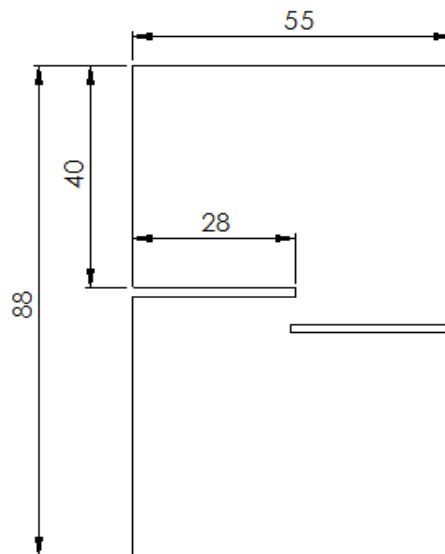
Ceramic bulk testing specimen geometry (dimensions in mm)
